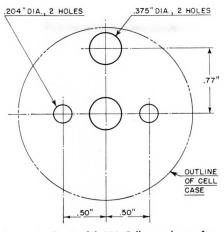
The Model 856 Cell may be surface mounted through four holes as shown above.
